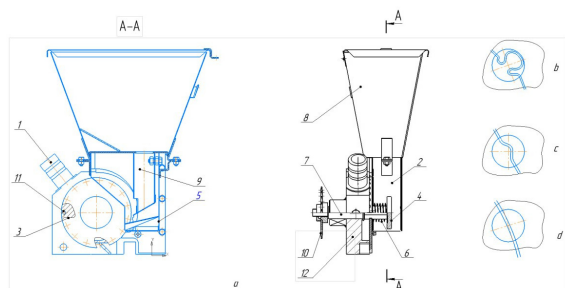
a-General view of pneumatic feed mechanism: 1-suker; 2-intake chamber; 3-sowing disk; 4-washer; 5-locking plate; 6-spring; 7- shaft; 8- seed hopper; 9-dispenser; 10-sprokit; 11- hole; b- hole with Ω -shaped jumper, c- hole with S-shaped jumper, d- hole with straight-shaped jumper.
